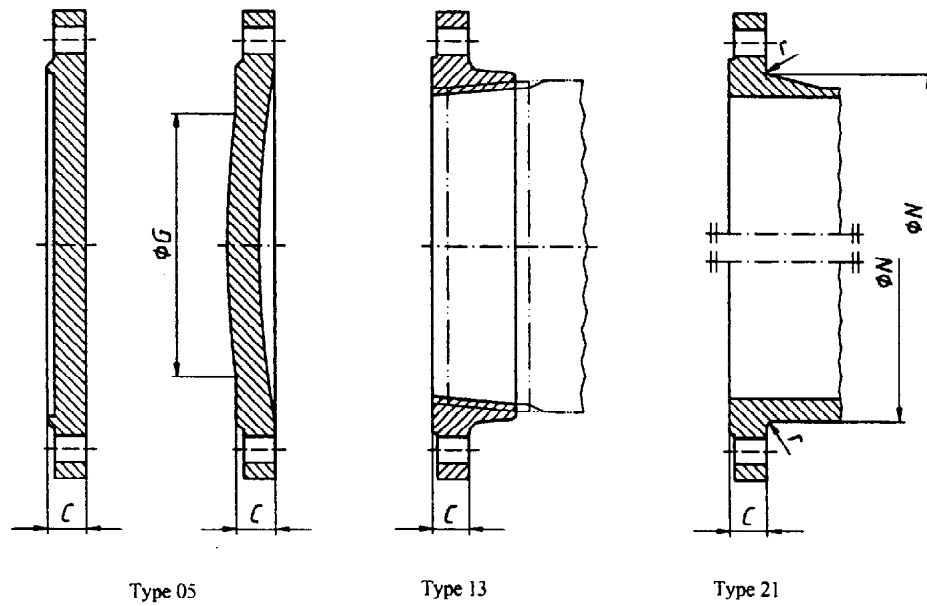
Dimensions of PN 2,5 flanges (see table 6)
